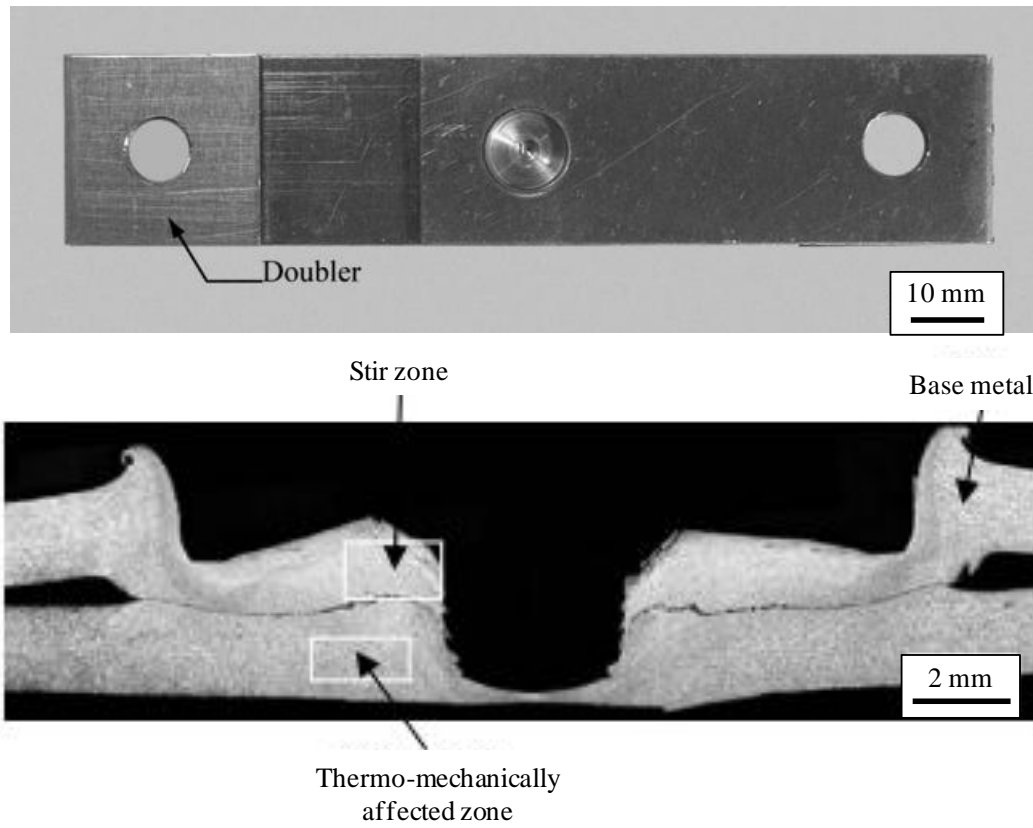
The friction stir spot welded joints and the cross-section area [54], [59].
